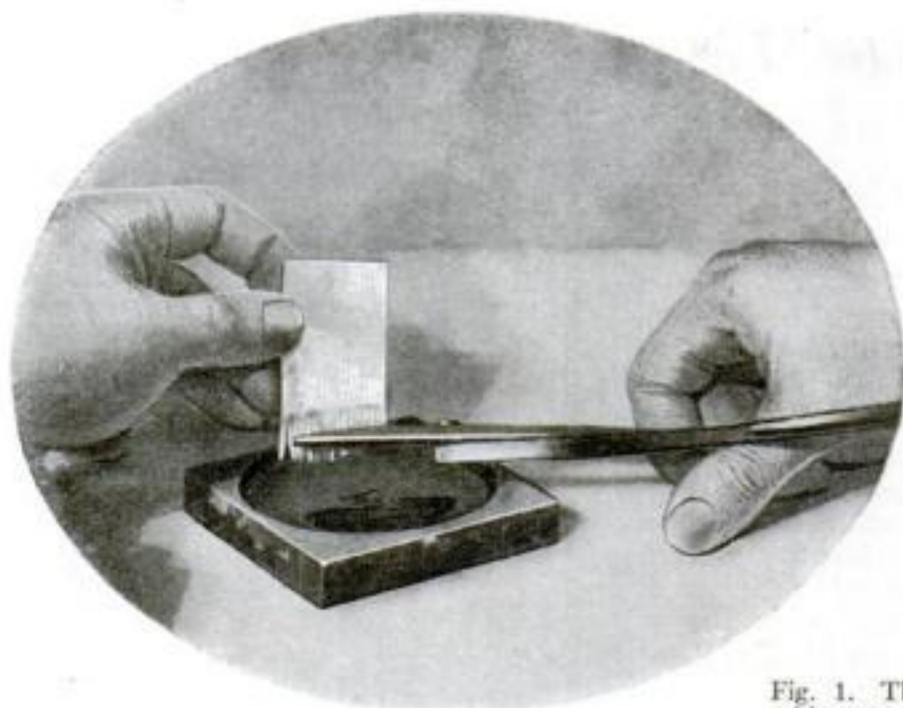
The sheet silver solder or spelter is cut into small, square pieces.
